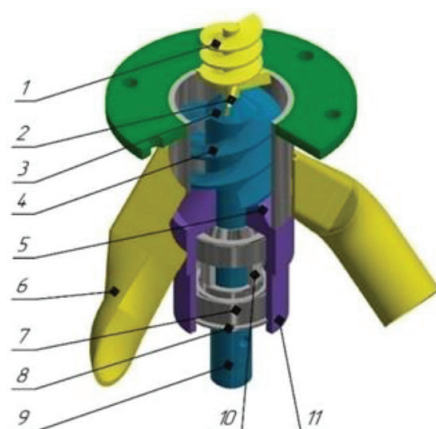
The scheme of a sowing unit for non-flowing grass seeds: 1—rotator; 2—blade supercharger; 3—cone; 4—helical spiral; 5—lower cone; 6—sleeve; 7—bearings; 8—retaining rings; 9—shaft; 10—intermediate ring; 11—bunker.
